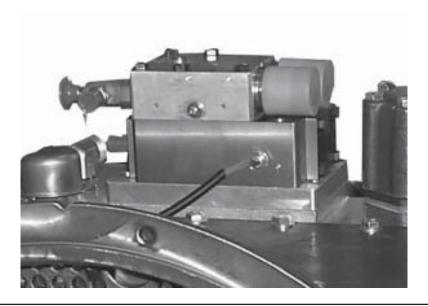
Install Top Valve Body onto Regulator Valve Assembly
